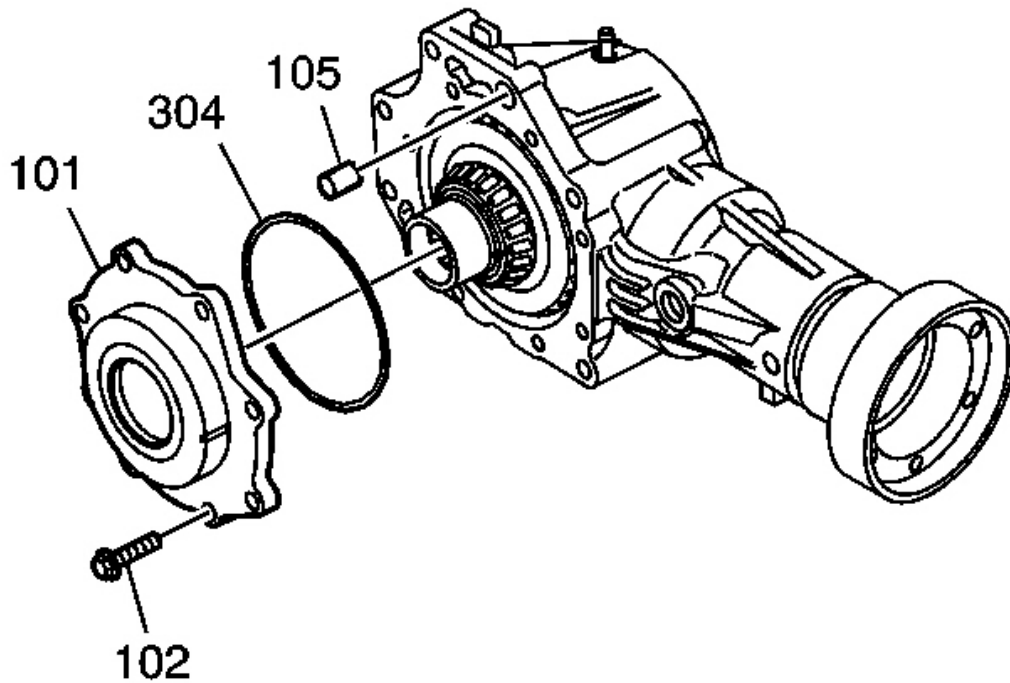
Installing O-Ring, Cover, Bolts & Locating Pin
